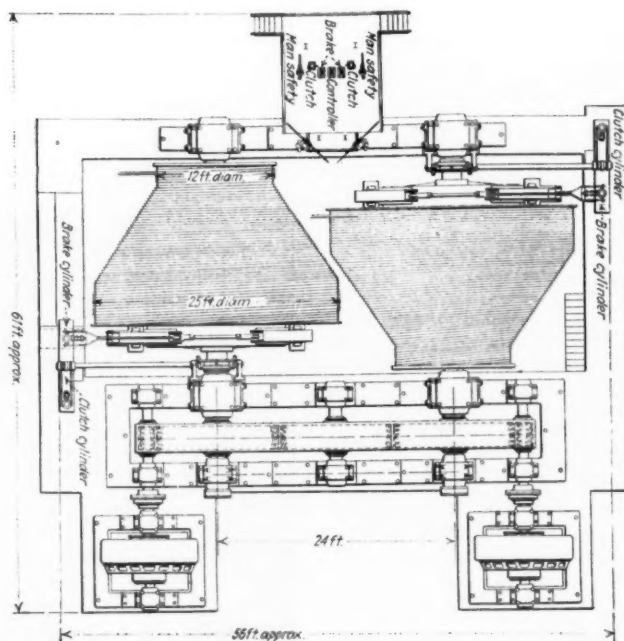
Plan Drawing of Ore Hoist, Showing Arrangement of Drums, Driving Gears, Bearings, and Motors
